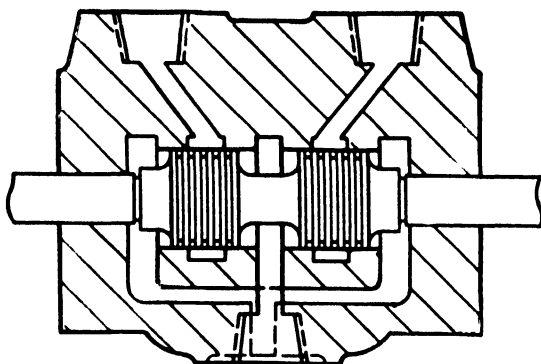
Blocked-center operating valve. (Hydro-Power Inc., Mount Gilead, Ohio.)
